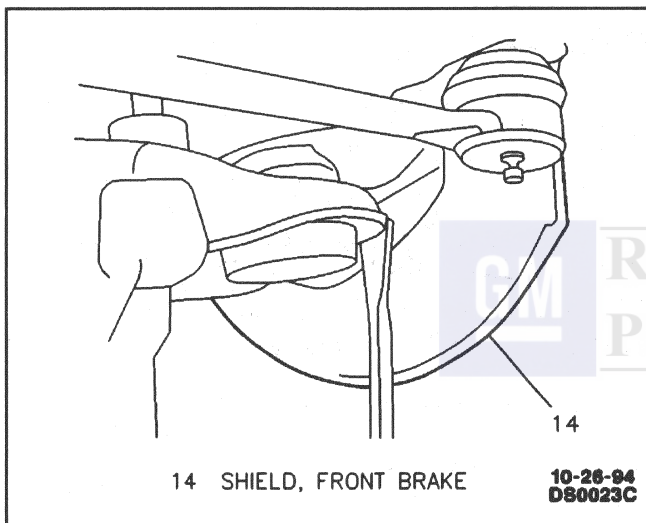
Guiding Front Lower Control Arm Past Front Brake Shield
